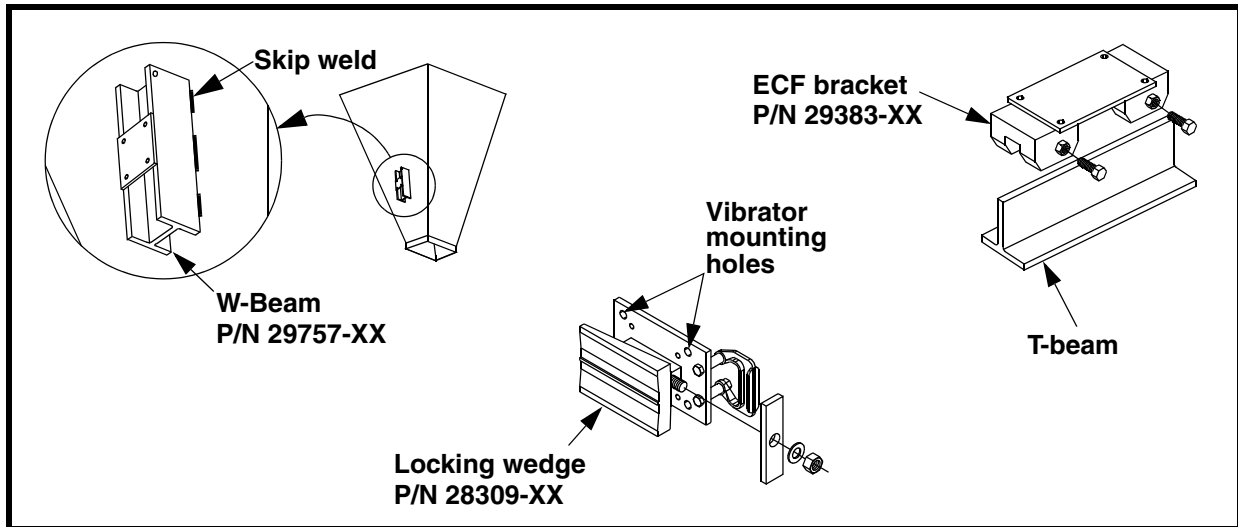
W-Beam, ECF Bracket, and Locking Wedge Mounts
